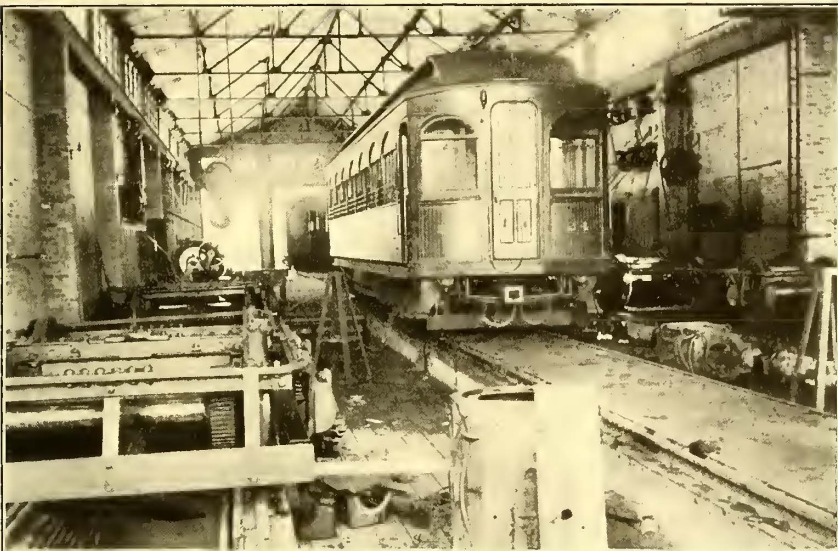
EQUIPMENT FOR REMOVING TRUCKS AND MOTORS
